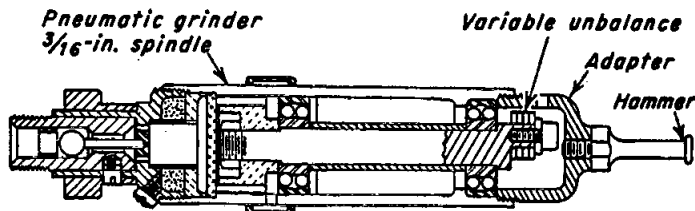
Standard pneumatic portable grinder converted to a peening tool by incorporating a centrifugal unbalance on the shaft. (Research Laboratories Division, General Motors Corporation, Ref. 4.)
